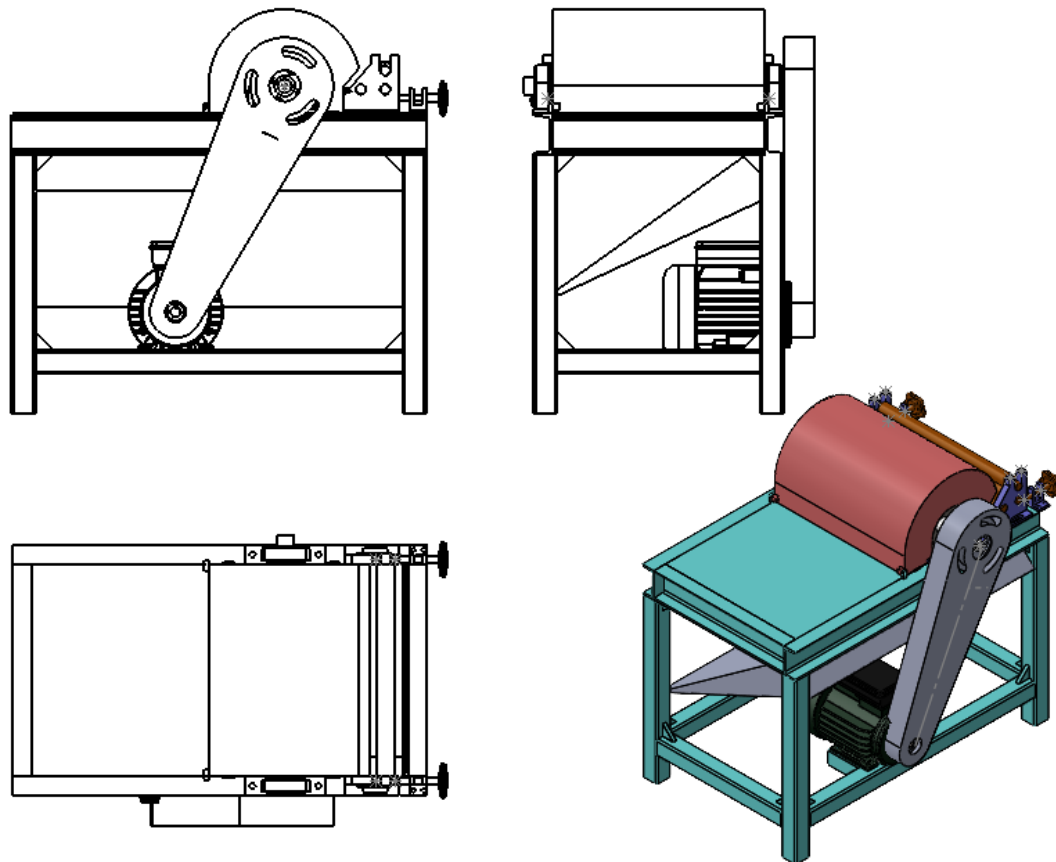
3D model of banana fiber extraction machine designed by Solidworks
